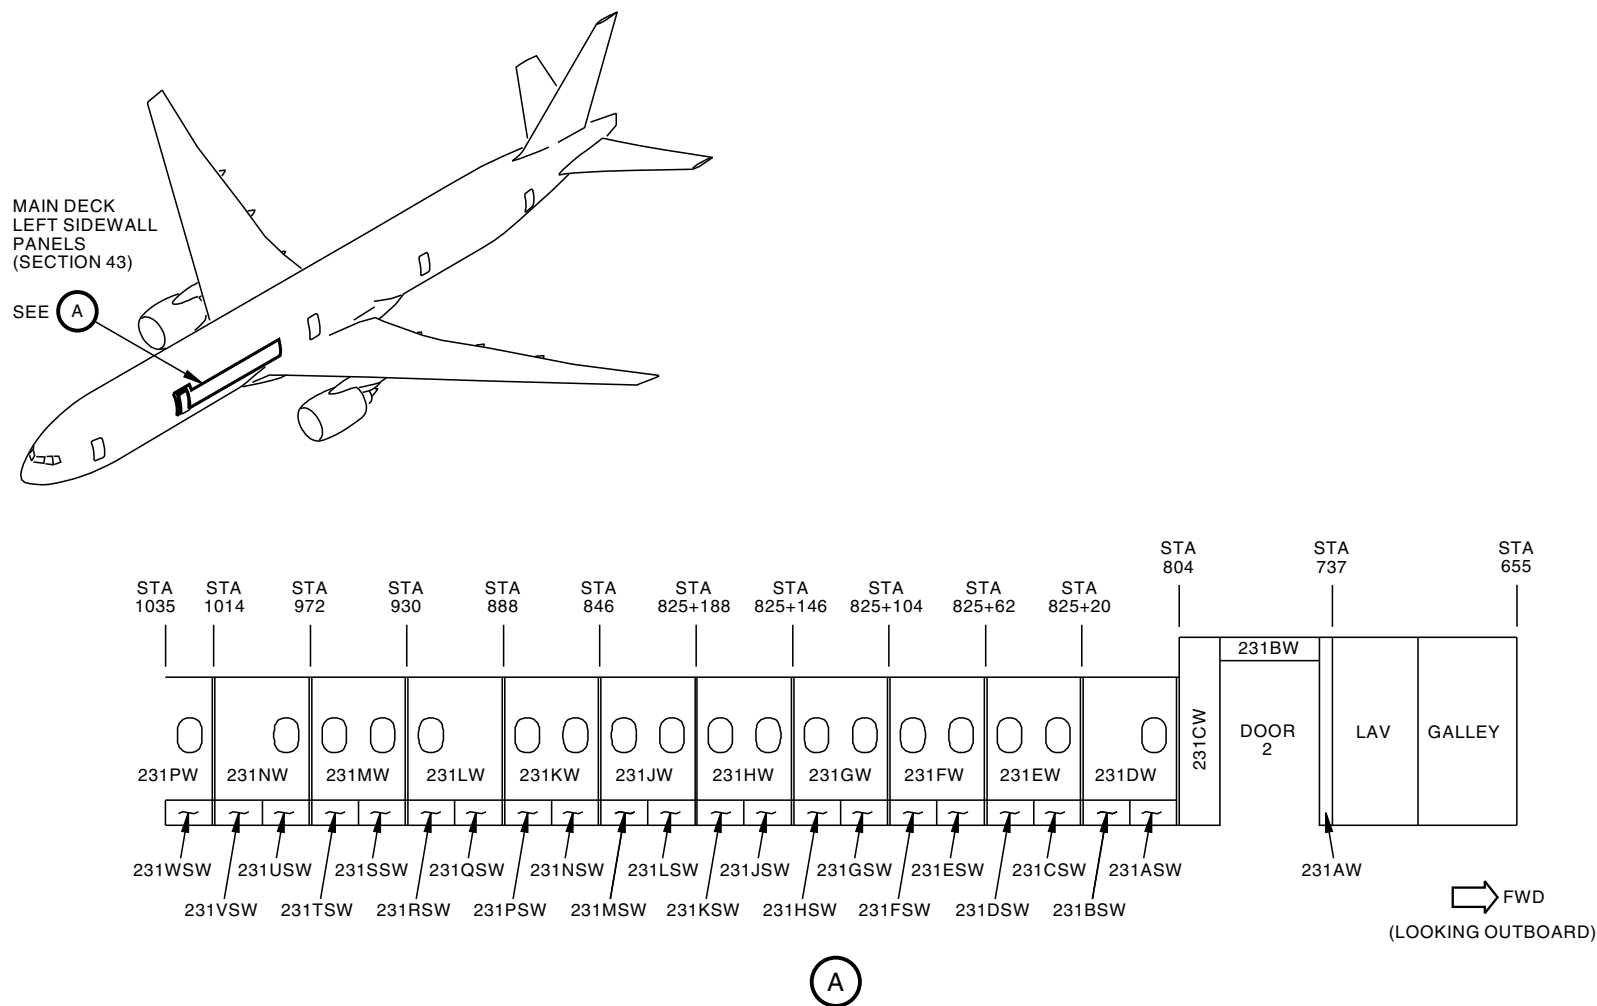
ZONE 222 PASSENGER CABIN SIDEWALL ACCESS PANELS
